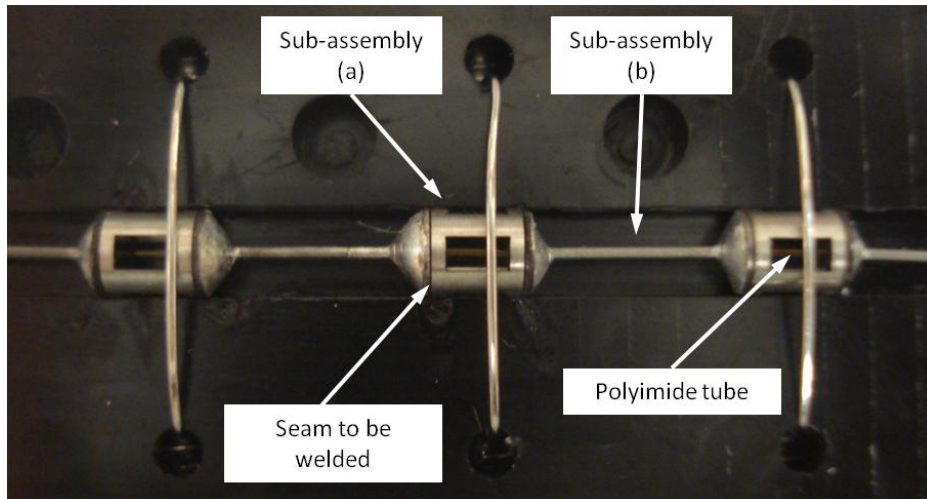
Fixture used for laser welding. Components secured with bailing wire. Polyimide tube can be seen through the sensing ports. Laser welding is used to create a continuous seam around the locations indicated above.
